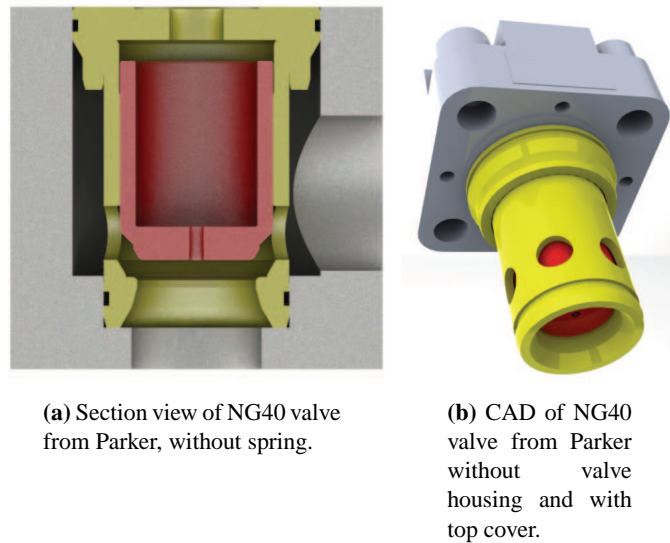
The actual valve construction in opened position; poppet is marked with red and sleeve with yellow. Figure 2.2.4a illustrates a section view of the actual NG40 valve and Figure 2.2.4b illustrates a 3D-view of the NG40 valve.
